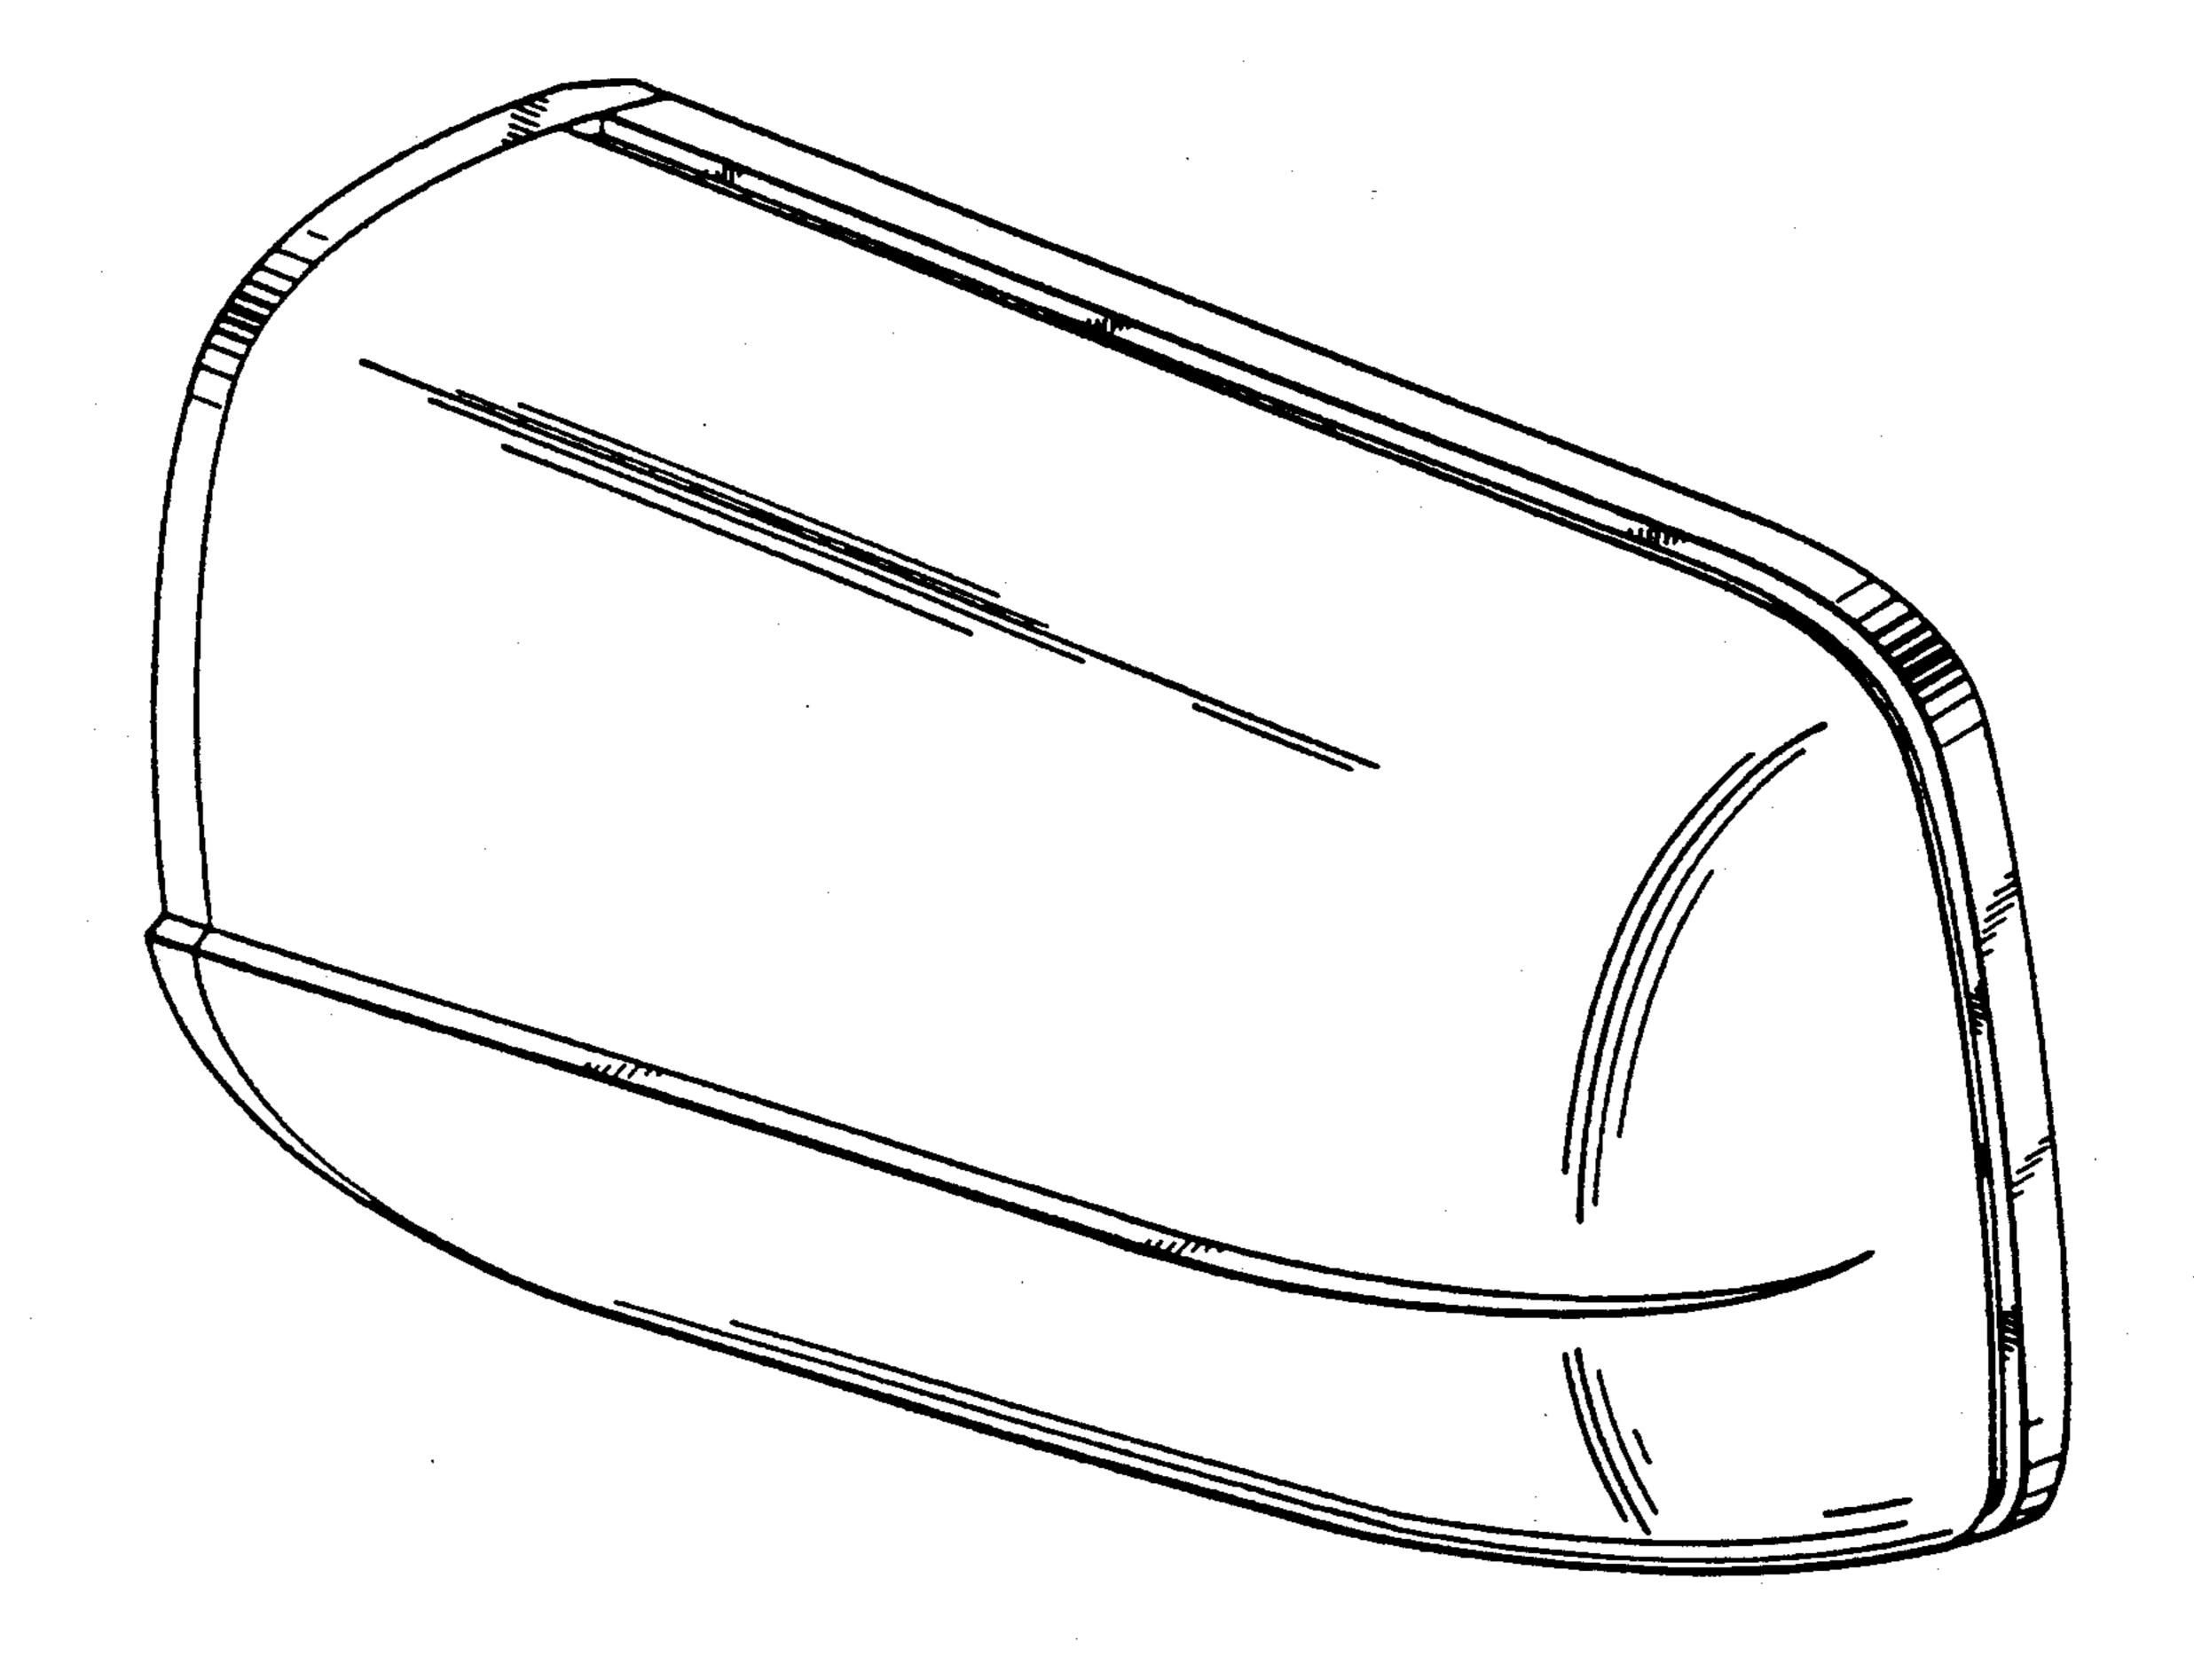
is a greatly enlarged rear elevation view thereof; FIG. 4 is a greatly enlarged perspective view of the rear and left side thereof;
